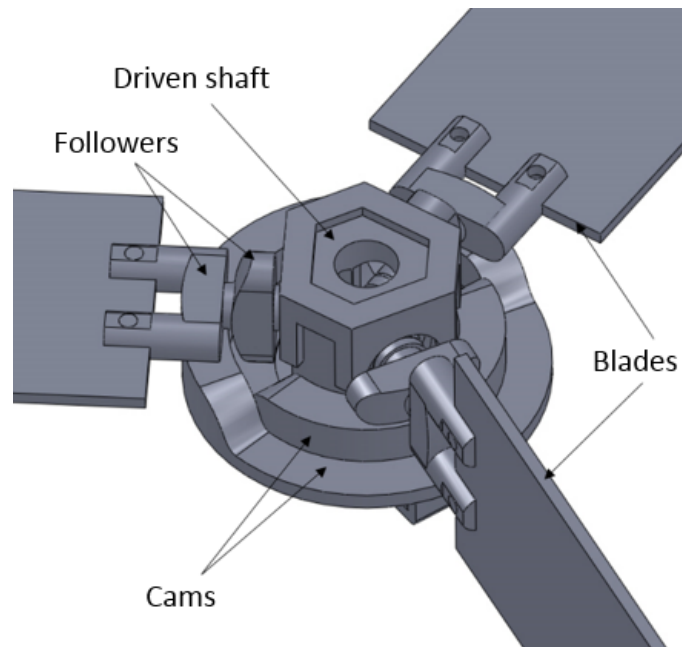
Assembly of the CPT turbine model indicating the different parts.
